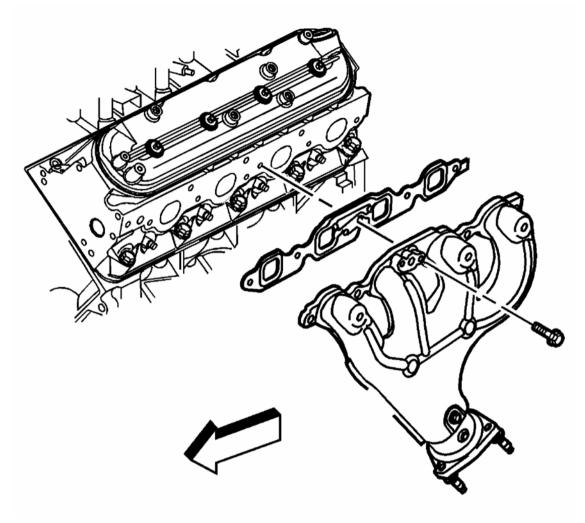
Left Exhaust Manifold, Bolts & Gasket Courtesy of GENERAL MOTORS CORP.
